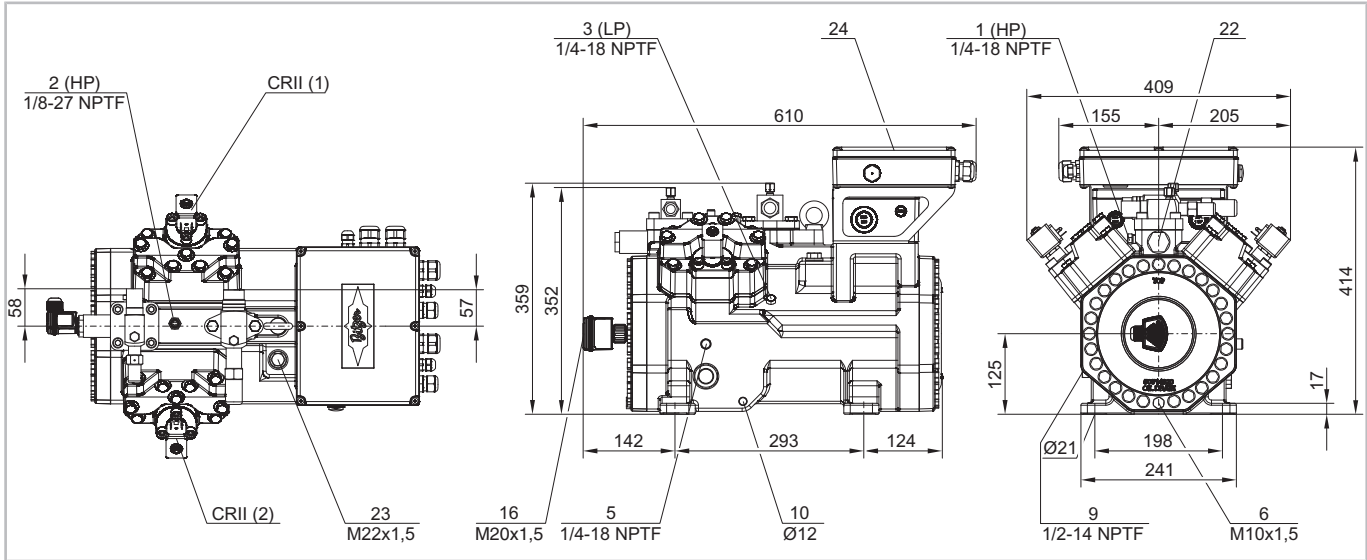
Dimensional drawing 4PTEU-6LK .. 4KTEU-10LK (representation with optional IQ MODULE and CRII)
